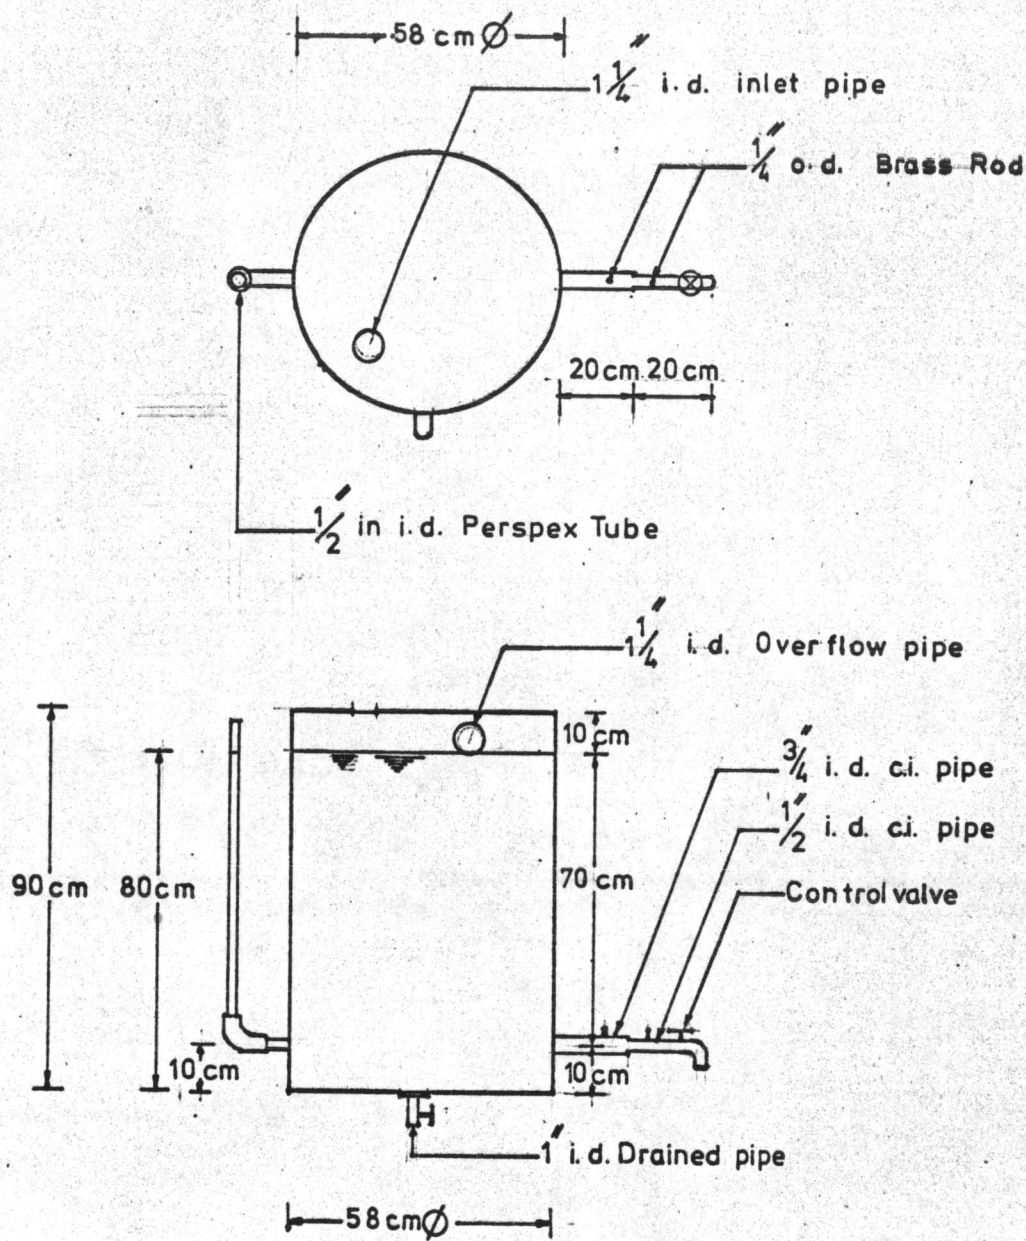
ARRANGEMENT AND DETAILS OF WATER CONSTANT HEAD DOSER
